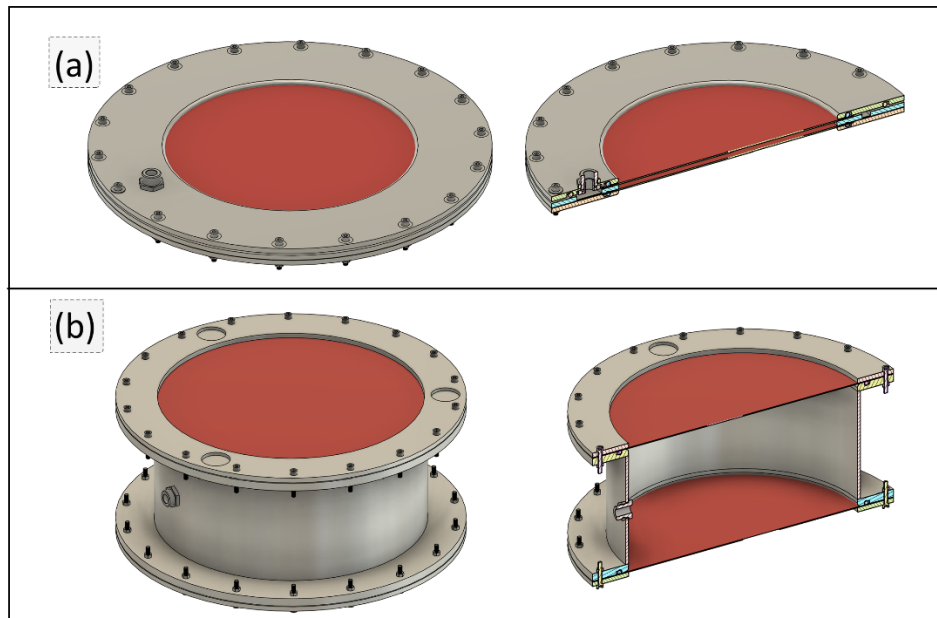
CAD representation of the blank holders manufactured in this study: a) no-tension (NT), b) pre-tension (PT) (diaphragms indicated in red).
